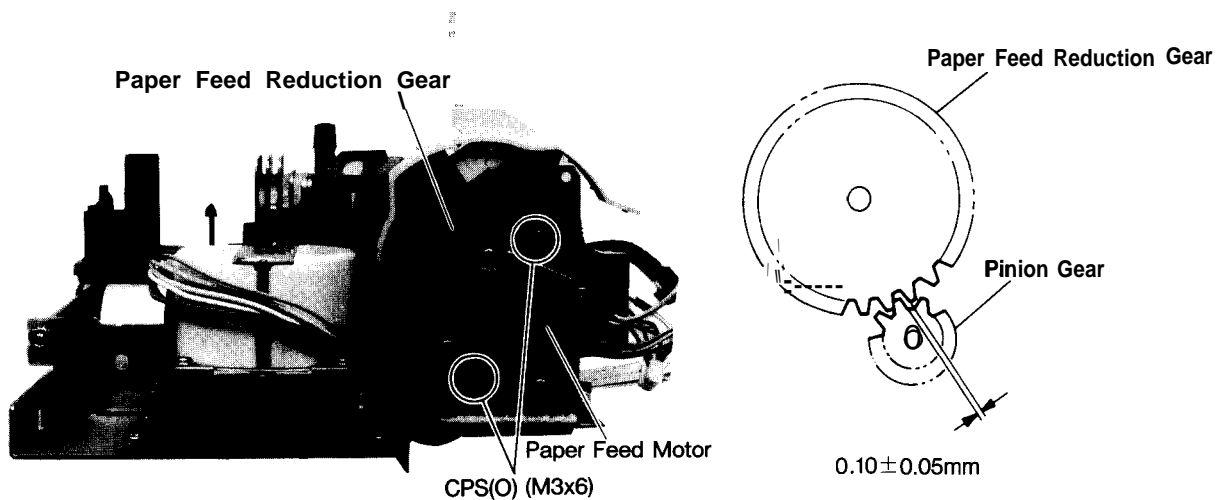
Paper Feed Motor Pinion Gear Backlash Adjustment
